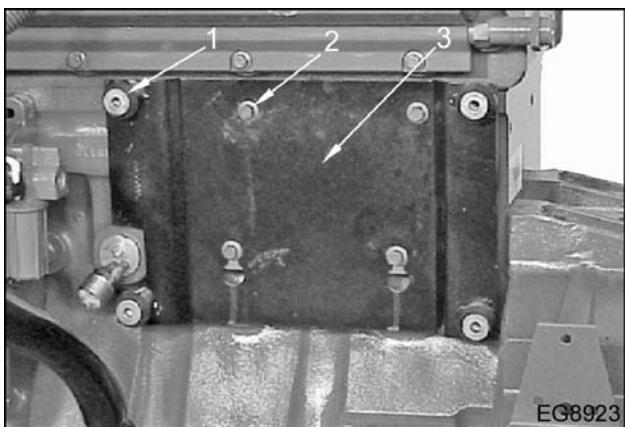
ECM bushings, pins, and bolts (rear mount ECM)
